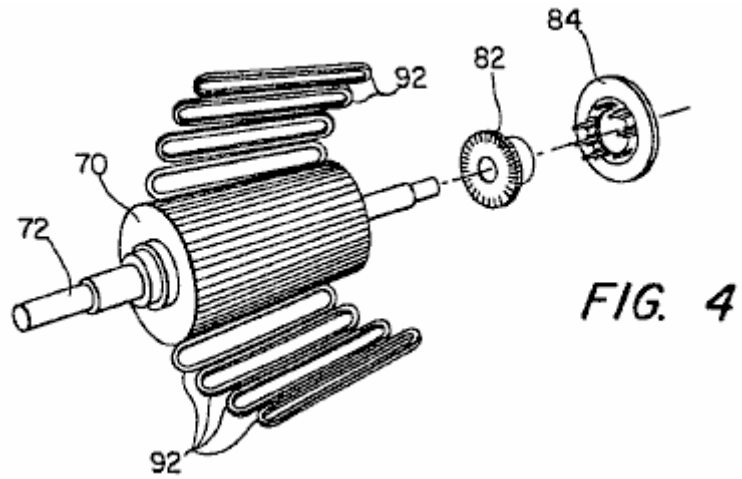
is an exploded perspective view of the basic components of the motor of Fig.3.
